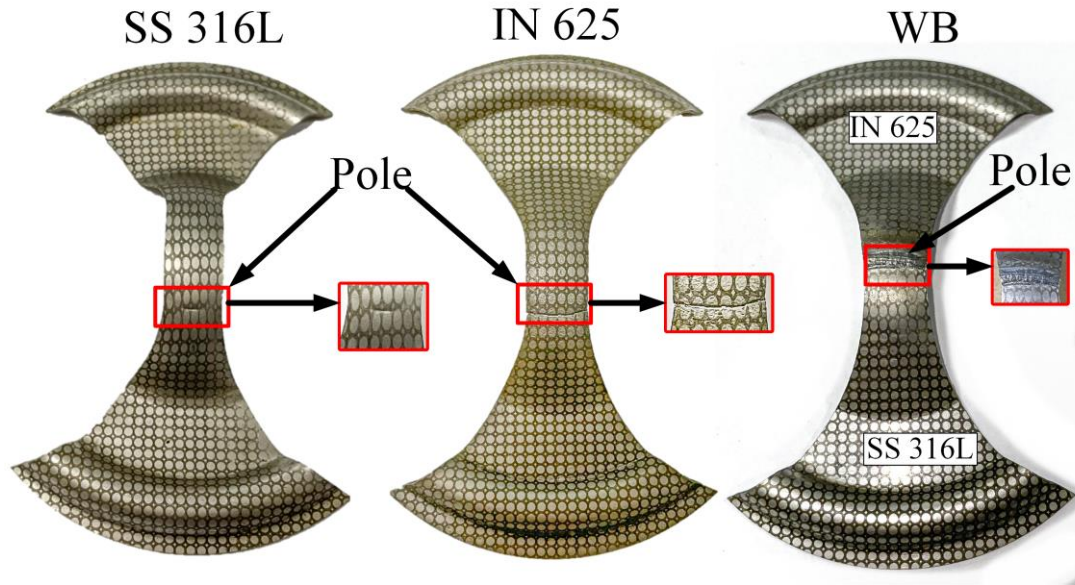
Stretched tension-compression specimen for the BMs and welded blank with their magnified view of fracture location
